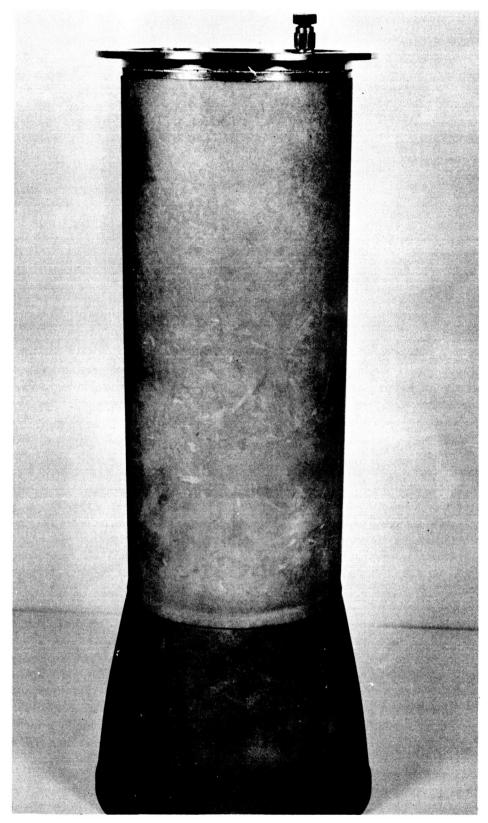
100-lb Thrust Chamber Assembly Before Installing Insulation
